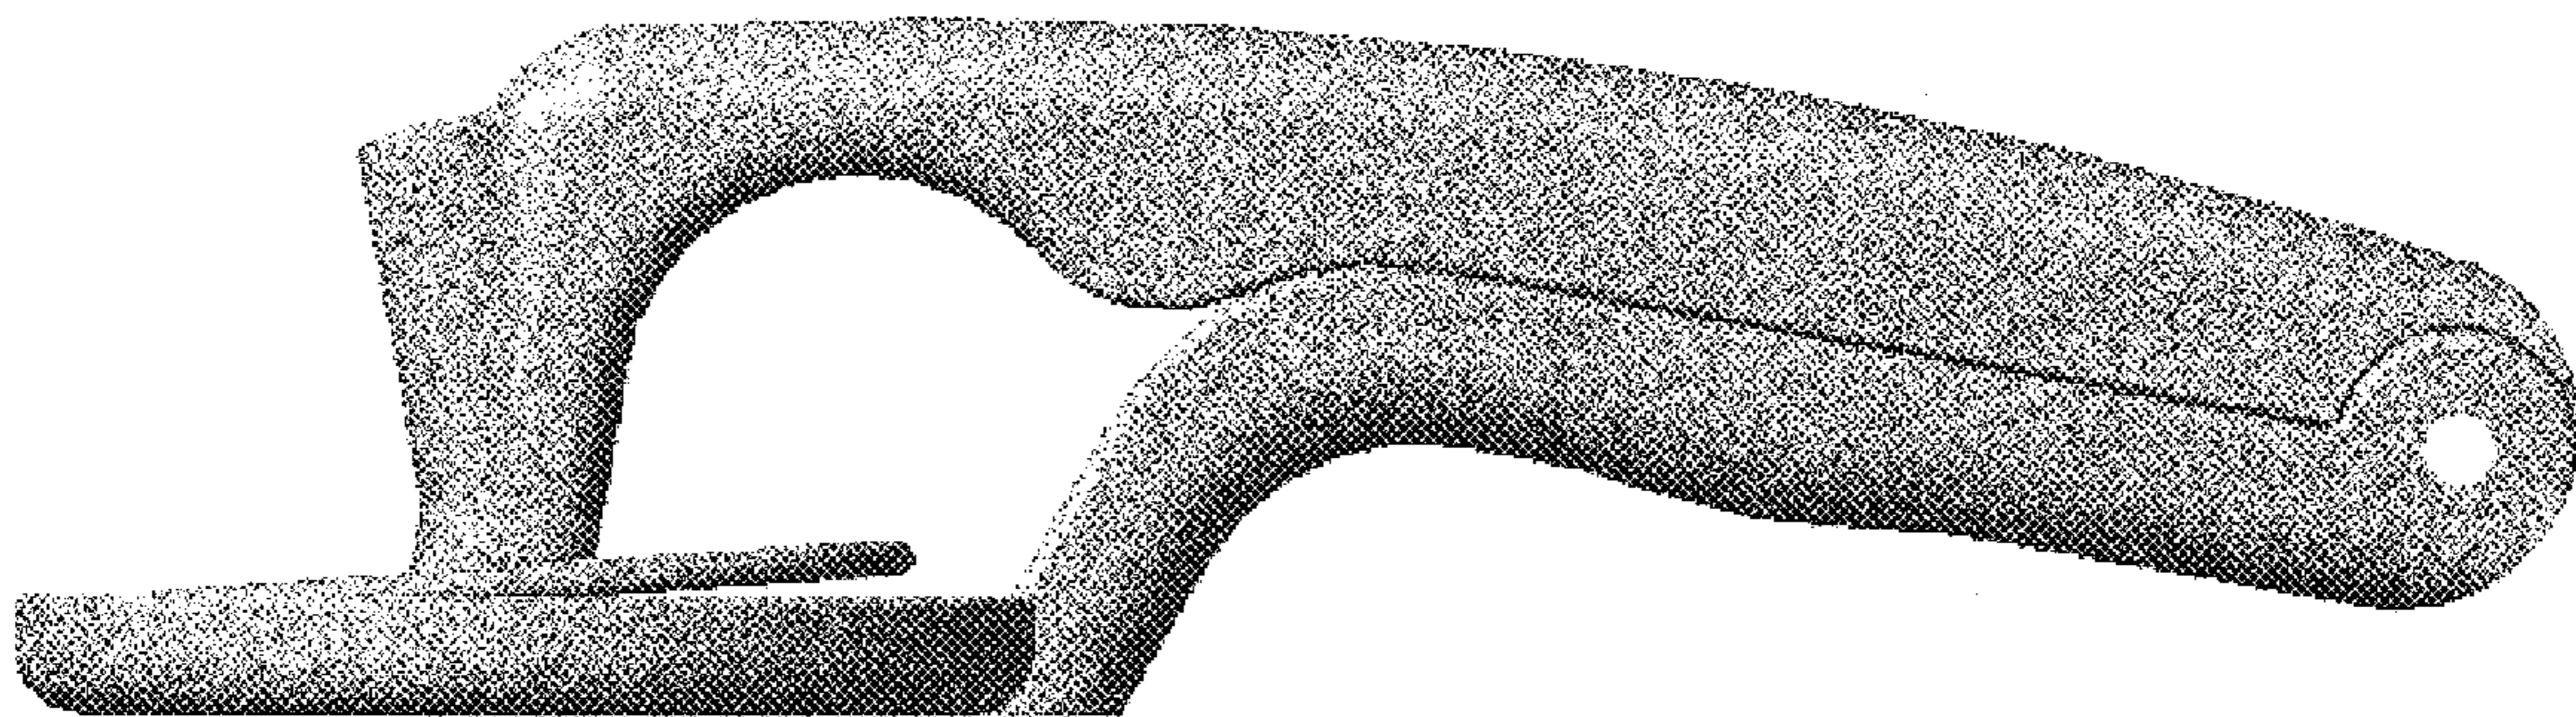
is a perspective view of the handle assembly of the present invention, showing the handle assembly in a bent position. The handle assembly includes a handle (10) and a shaft (12) which is connected to the handle (10) at a pivot point (14). The handle (10) is shown in a bent position, and the shaft (12) is shown in a straight position. The handle (10) has a curved shape, and the shaft (12) has a straight shape. The pivot point (14) is located at the end of the handle (10) and the beginning of the shaft (12).
